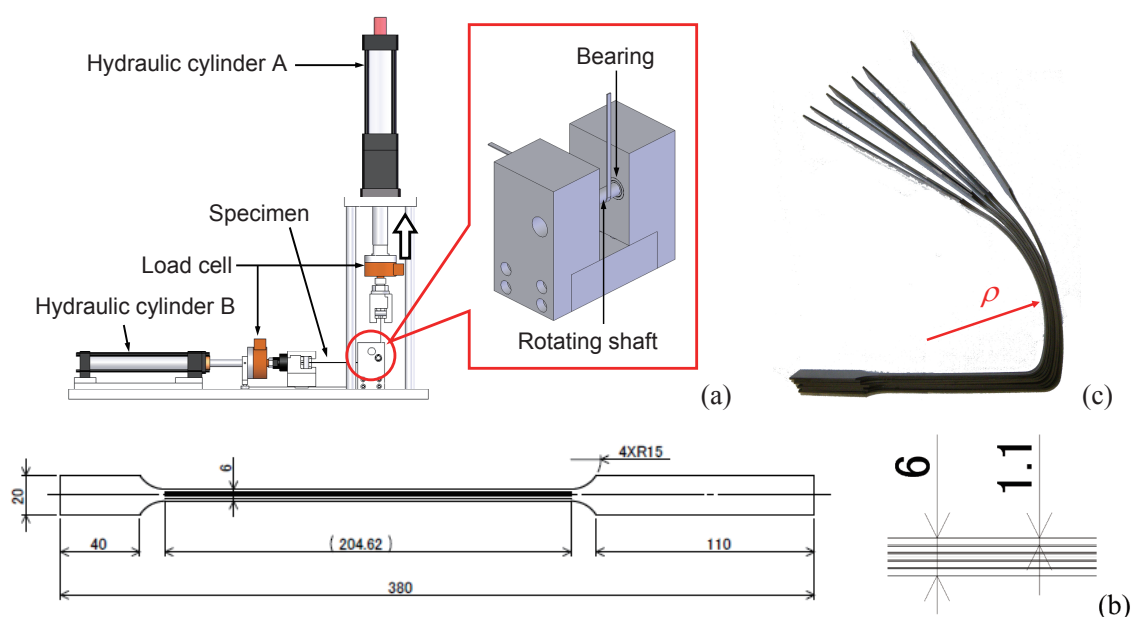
(a) Experimental apparatus and (b) geometry of specimen for draw-bending test of sheet metals and (c) specimen after springback^{2,3)}.
